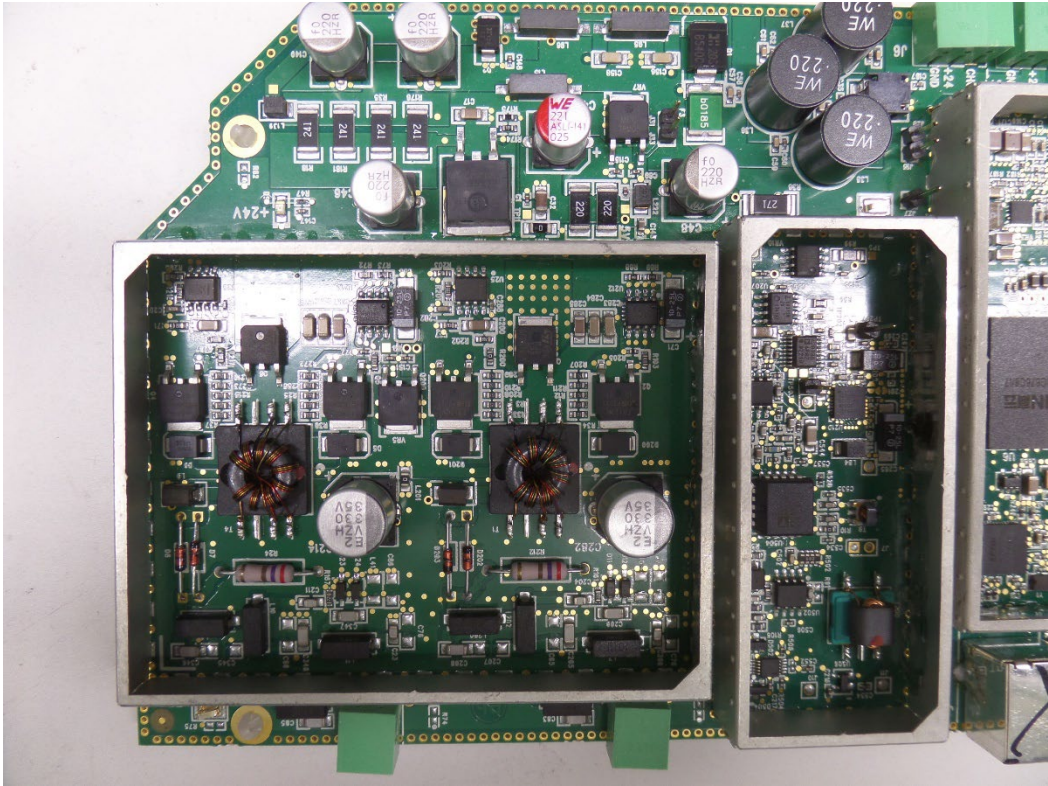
NP22 PRI/PAB LOWER BASE EAS RF BOARD TOP SIDE RF SECTION
